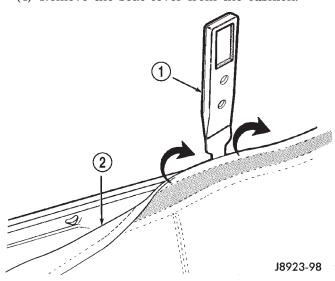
Seat Cushion Cover Retaining Clip Removal
